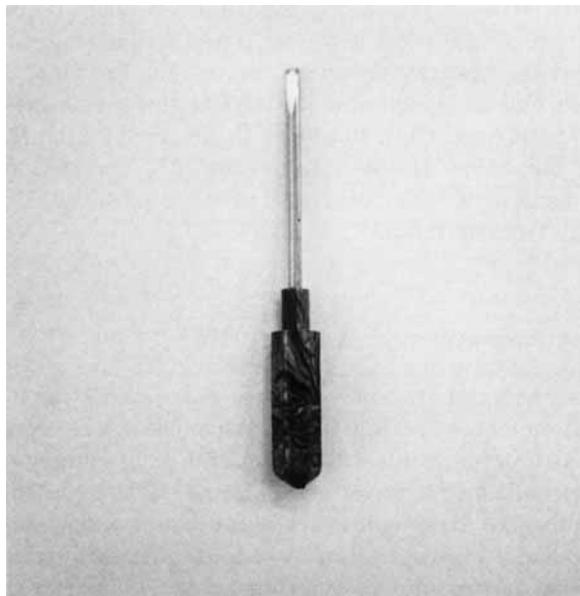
Injection-molded screw driver handle, formed from the ND polyester. Note the weld lines caused by jetting. This occurs typically with LCPs when using molds with gating designed for conventional thermoplastics.
